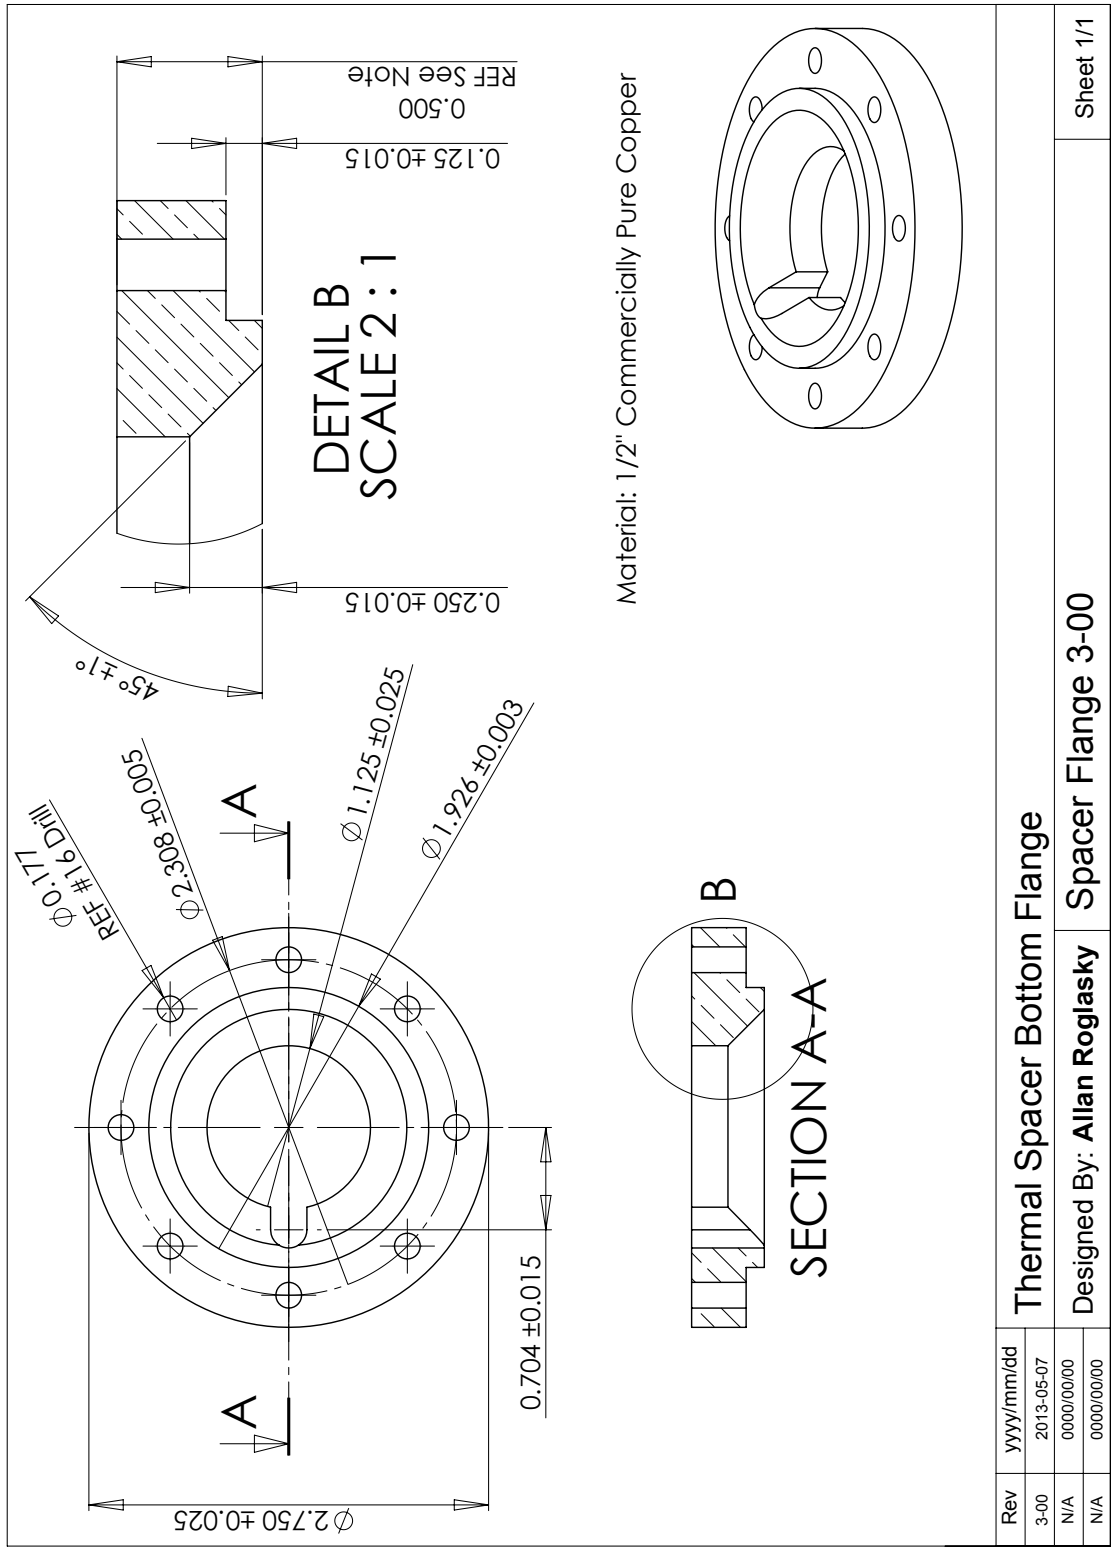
Thermal Isolation Spacer Assembly / Bottom Flange
